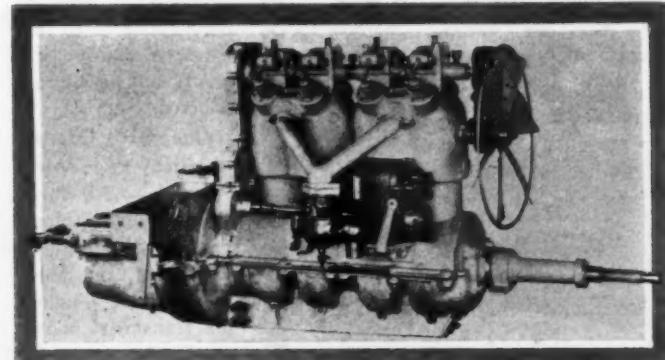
Model 30 motor from intake side, showing housing for the silent chain drive for the camshaft
